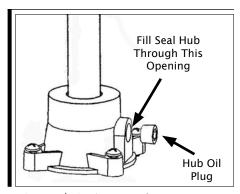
| Fill Seal Hub (while power unit is upright) with Otterbine oil until the oil is in the bottom of the threads (Approximately 12cc).
